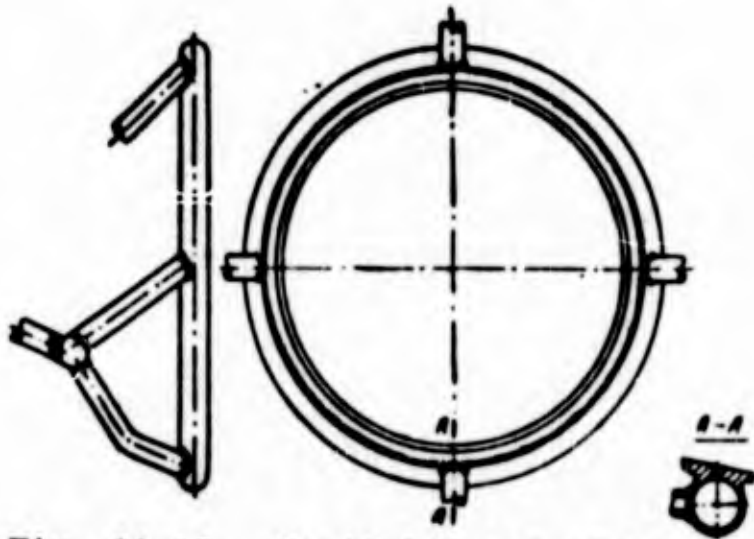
Manifold ring of liquid-fuel rocket engine.
